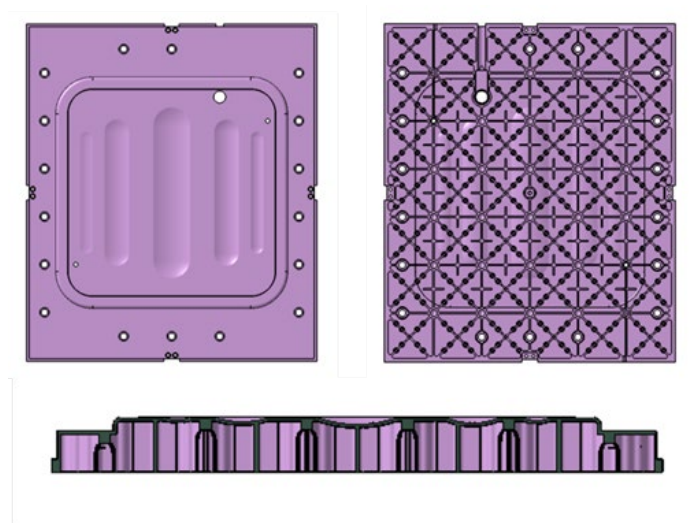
Representation of machined mold face. Courtesy of Surface Generation.
